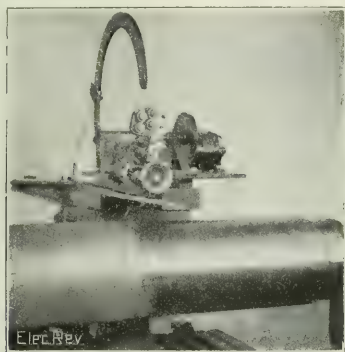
AN AUTOMATIC ELECTRIC WELDER.
